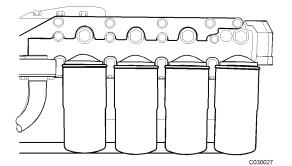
LUBE OIL FILTERS Upper Right Front of Engine
